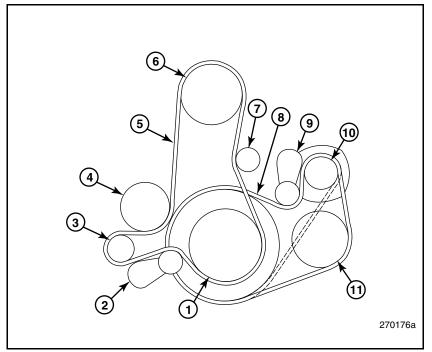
Drive Belt Routing — MP7 and MP8 Engines
